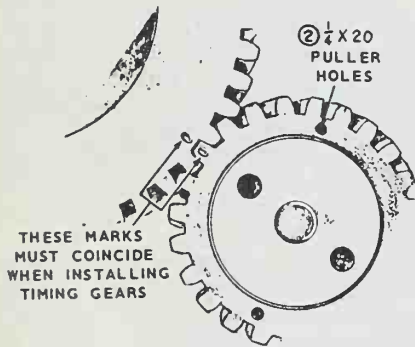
Align crankshaft and camshaft timing marks as shown when installing camshaft.
